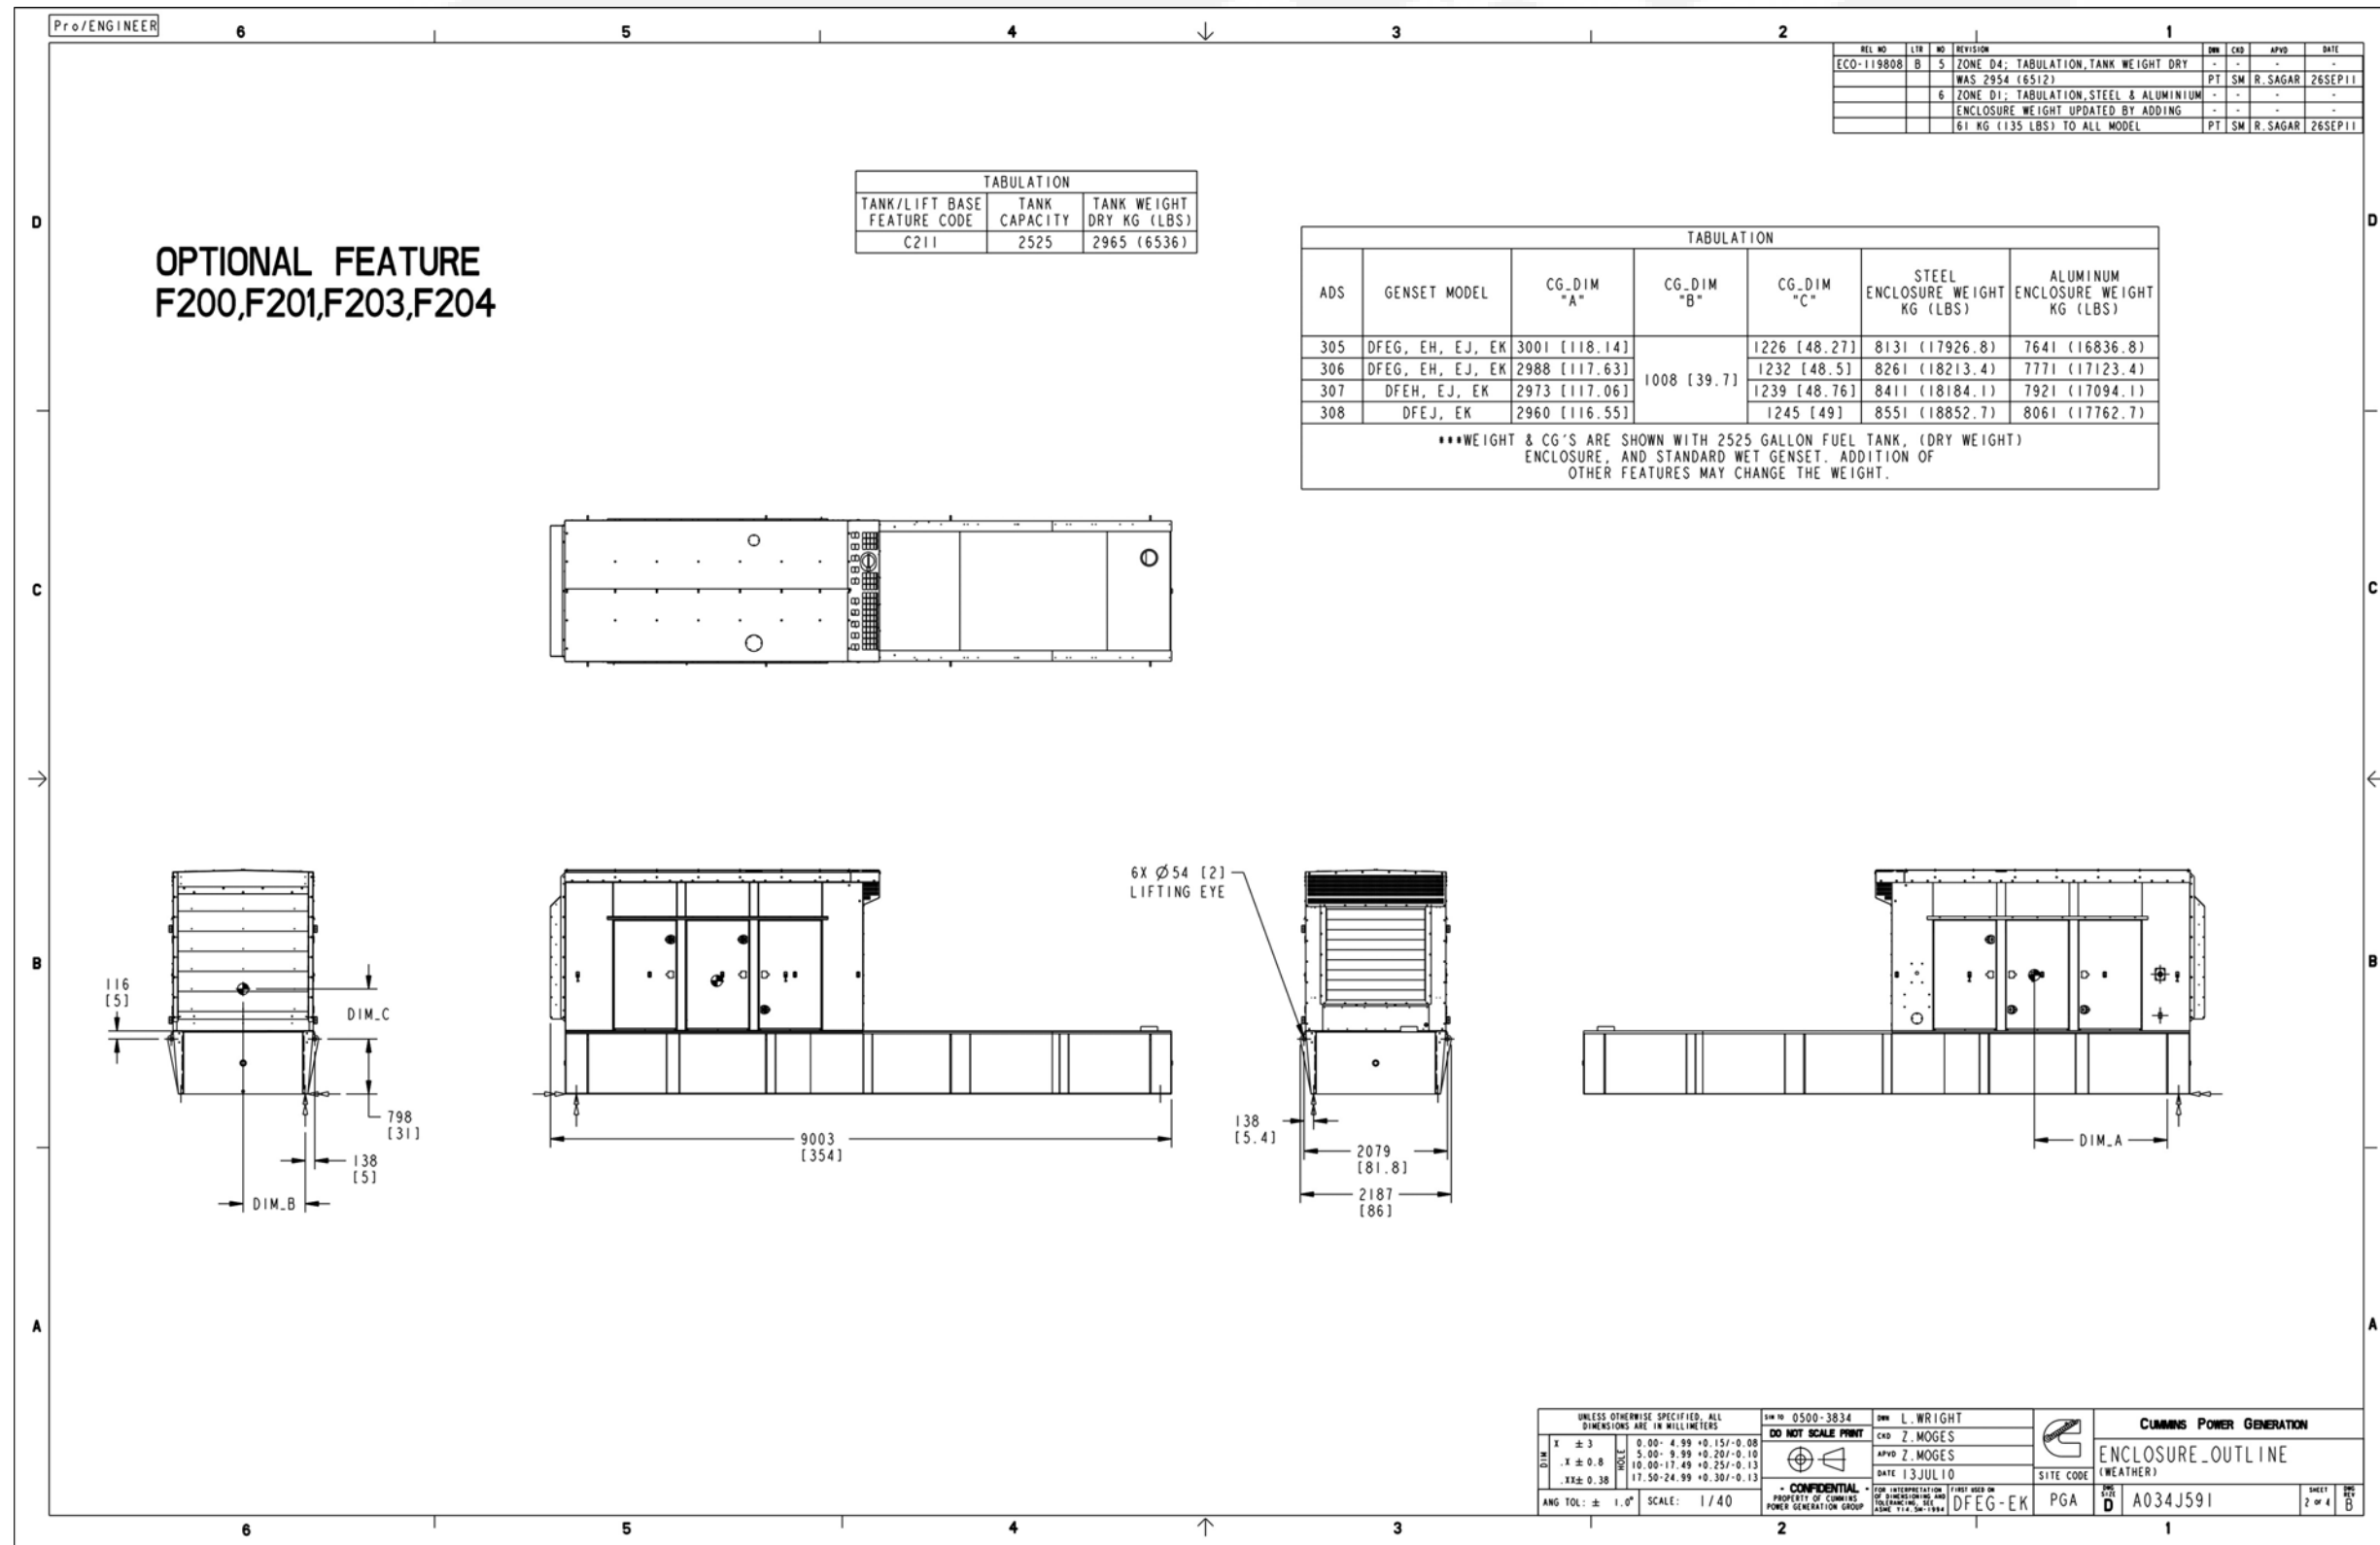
ENCLOSURE OUTLINE DRAWING (F200, F201, F203, F204, F206) (SHEET 2)
